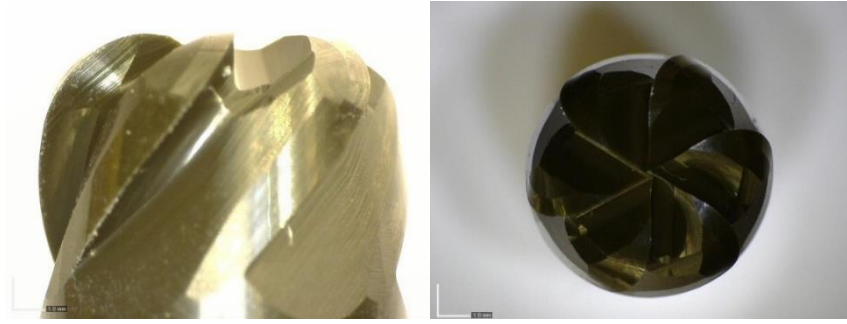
Solid milling tool geometry with 6 teeth (6Z).
